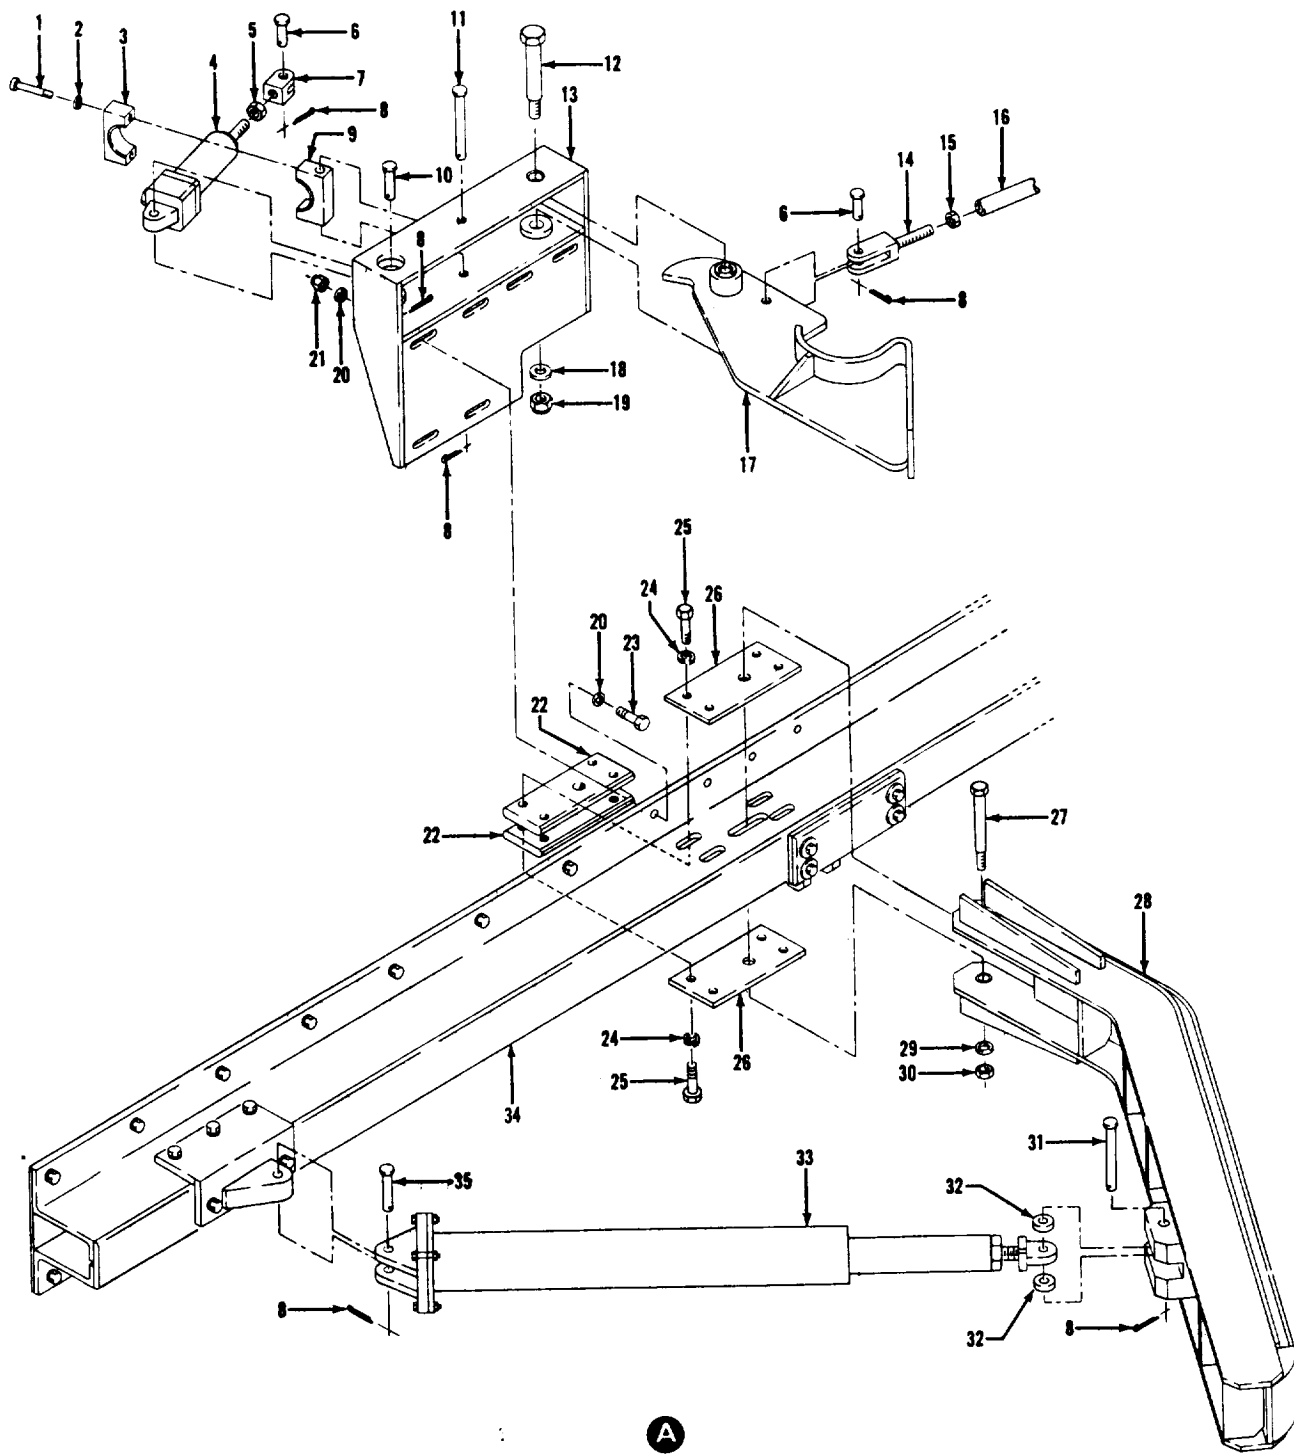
LES Coupler Assembly (Sheet 2 of 9)
